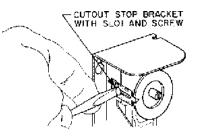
All models have a screw type cutout stop. The stop screw must be loosened and moved to the stop setting desired. Tighten screw after setting is made.
